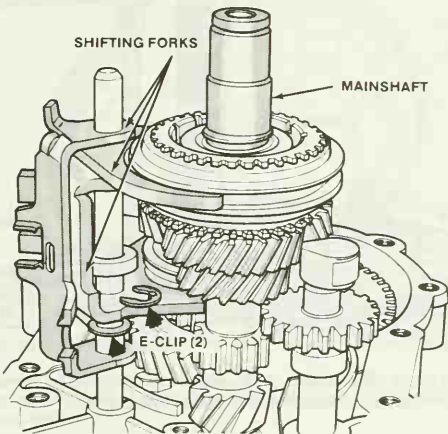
Removing the shifting fork assembly. (Chrysler Corporation)
